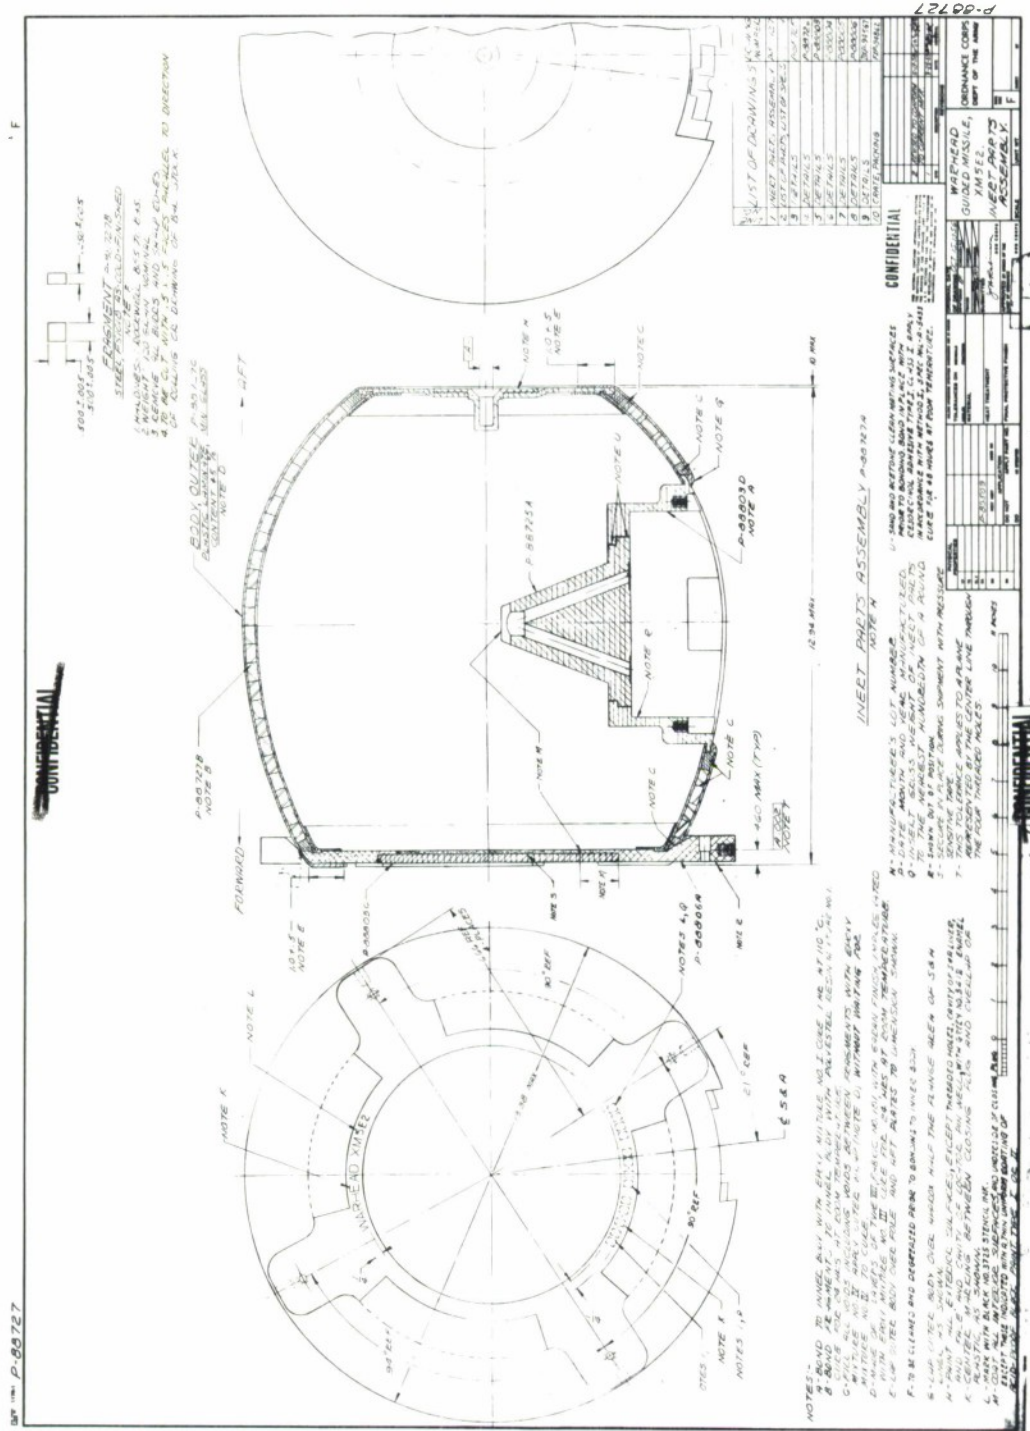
Inert Parts Assembly of XM5E2 Guided Missile Warhead
